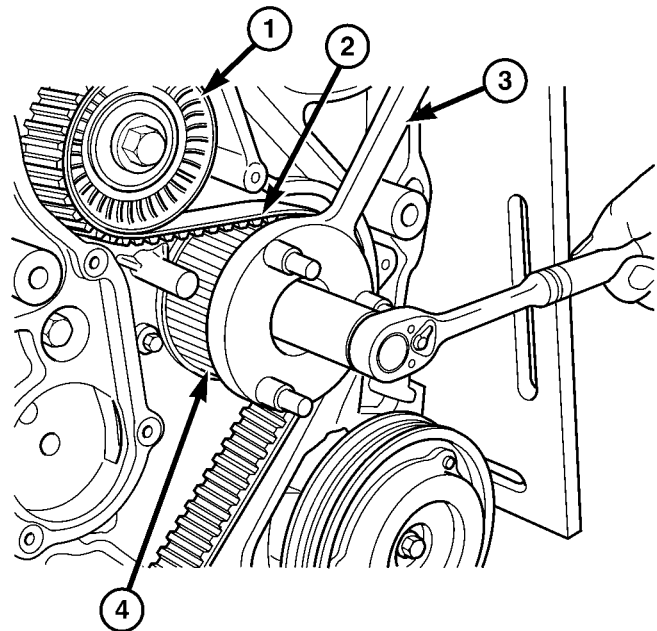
INJECTION PUMP SPROCKET RETAINING NUT REMOVAL/INSTALLATION
